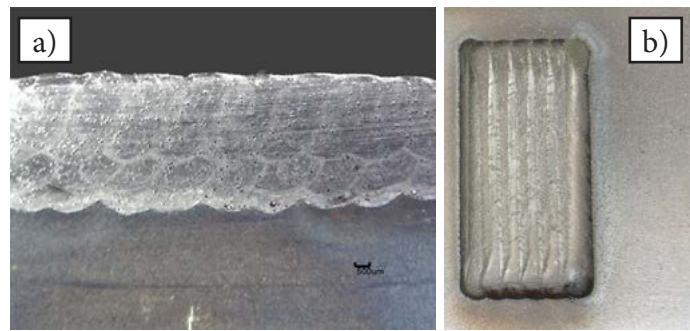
Macrostructure in the cross-section of the multi-run three-layer overlay weld (a) and the main view of the overlay weld (b); substrate - S355 steel, overlay weld – Inconel 625+WC (87%-13%)
